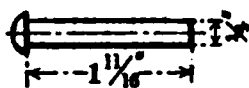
Rivet, Soft Iron or Steel, Galvanized
